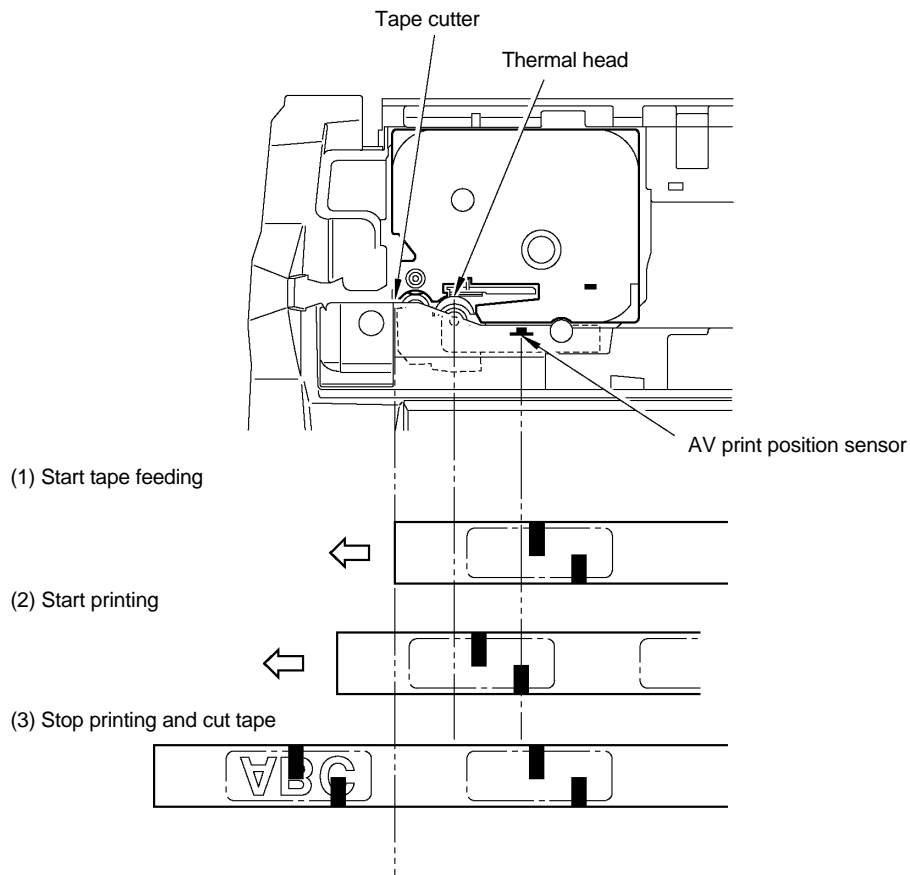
AV Label Print Start Position Detector Mechanism
